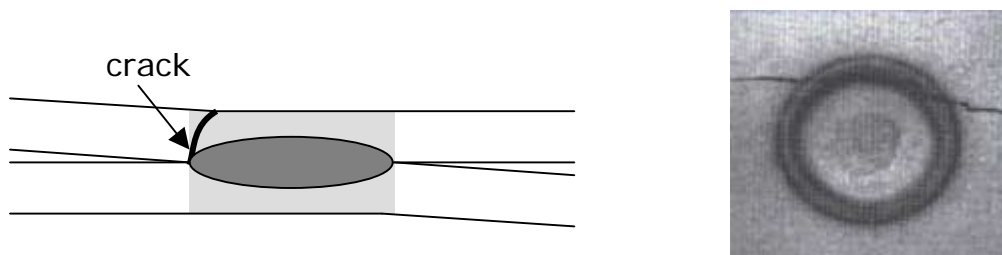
A typical sheet fracture fatigue crack (left) and a photo of the crack propagation along the surface of the base sheet material (right)
